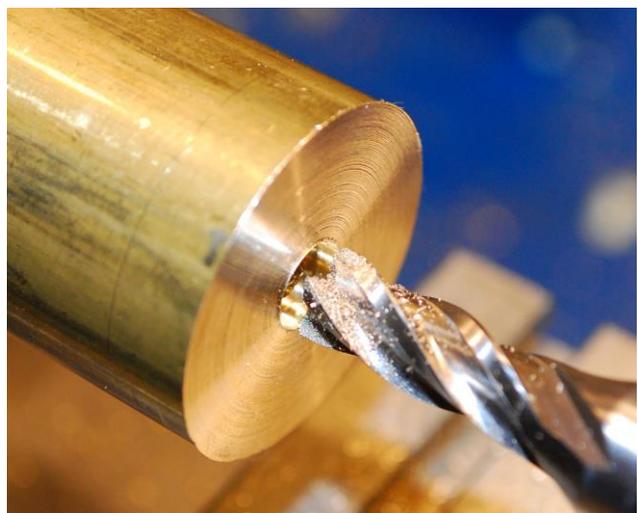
Counter bore the center hole with an end mill to create a flat bottom.
